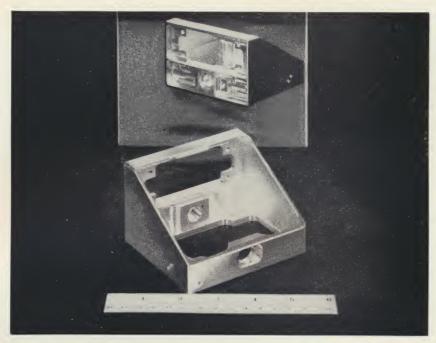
Only three work-holding fixtures are required to produce ten variations of these brackets. Each part is machined in three setups using three tape programs. Over 90 per cent of original part material is removed in a total machining time of seventy-six minutes.
